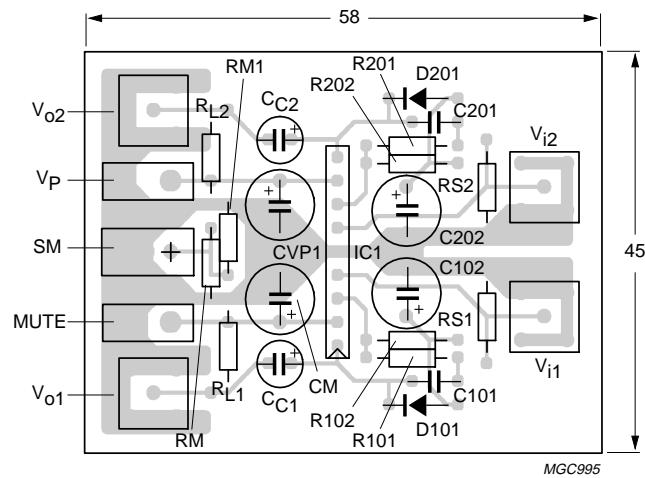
Printed-circuit board component side, showing component layout of Fig.1 and/or Fig.10.
